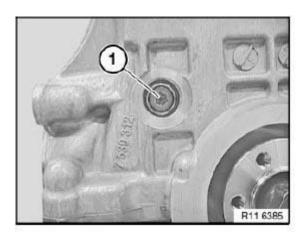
Identifying Screw On Chain Drive (Bottom) Courtesy of BMW OF NORTH AMERICA, INC.
